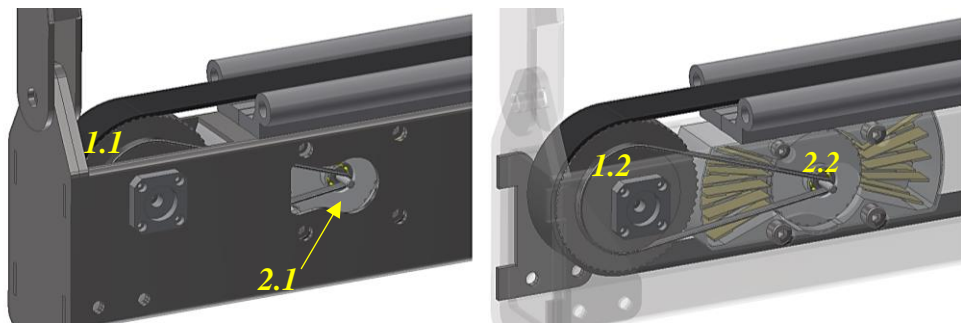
Manufacturable EH device “UCD” mount casing placement in slider assembly
